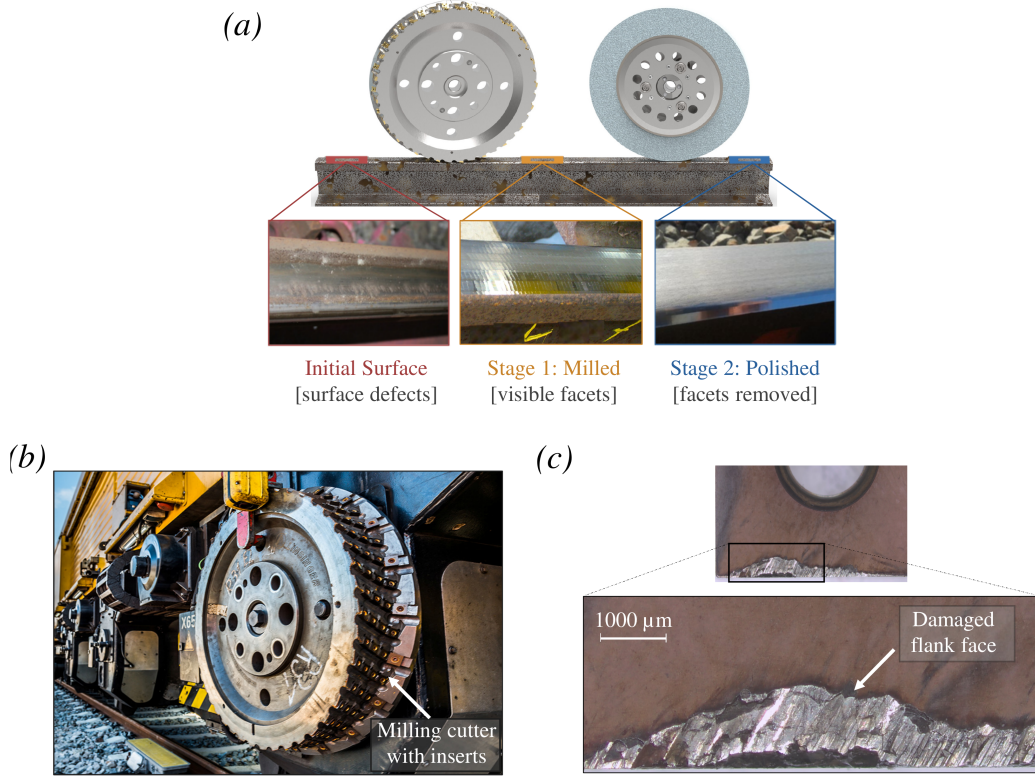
Rail milling process context and motivation for thermo-mechanical load analysis. (a) Two-stage rail reprofiling process. (b) Industrial rail milling unit by Linsinger Maschinenbau GmbH showing a milling cutter equipped with cutting inserts. (c) Microscopic image of a cutting insert showing a plastically deformed and worn region on the flank face, illustrating the severe loading conditions that motivate numerical simulation of forces and temperature evolution.
